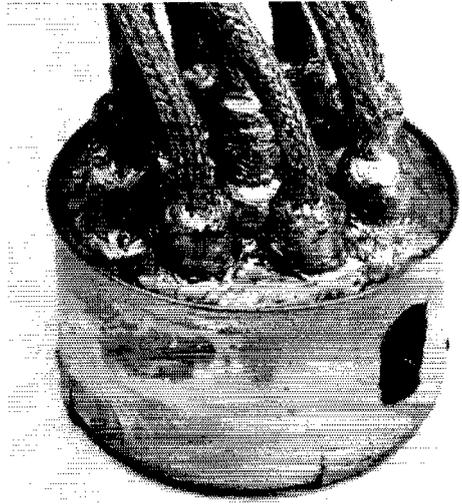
Close-up of the shielded distributor cap assembly. Note the shims soldered to the underside lip of the distributor cap cover.
